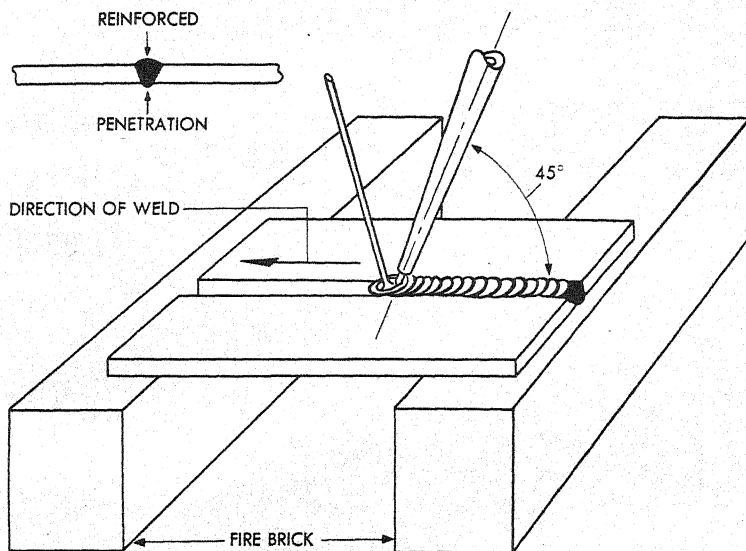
Position of the rod and torch in making a butt joint in the flat position.
